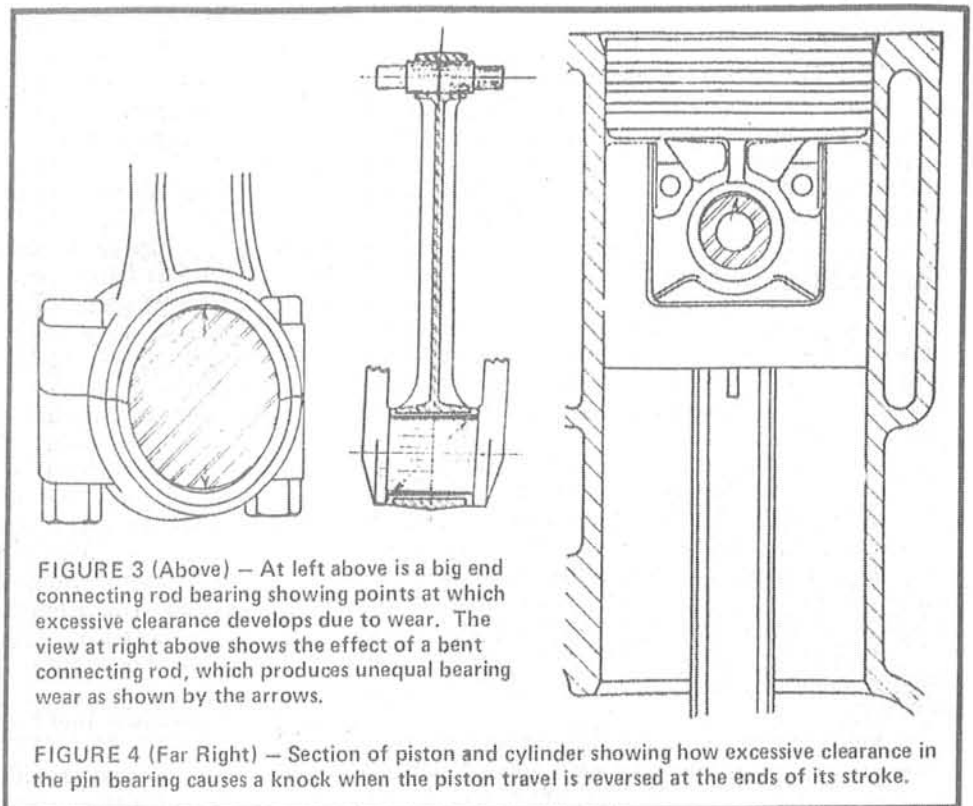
(Above) — At left above is a big end connecting rod bearing showing points at which excessive clearance develops due to wear. The view at right above shows the effect of a bent connecting rod, which produces unequal bearing wear as shown by the arrows.
